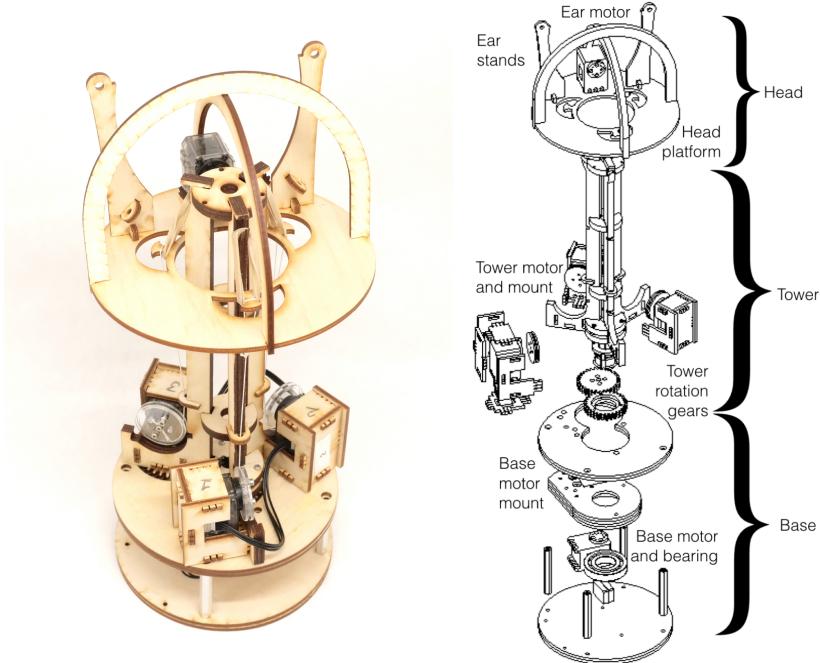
The inner tensile actuation mechanism and an exploded view of the mechanism. The main expressive element is the head platform, which is suspended from a tower by rubber bands and actuated by cables driven by motors at the bottom of the tower. The tower itself is rotated by the base motor. As an example of an appendage, the head platform features ear stands and a motor for actuating the ears.
